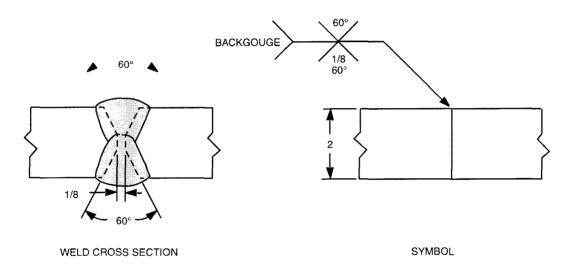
Symmetrical Groove Welds with Backgouging
